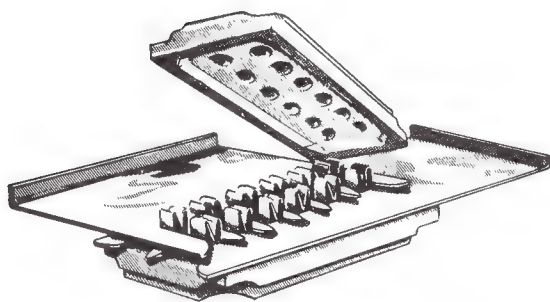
Illustration showing the use of the TDQ contact alignment tools
